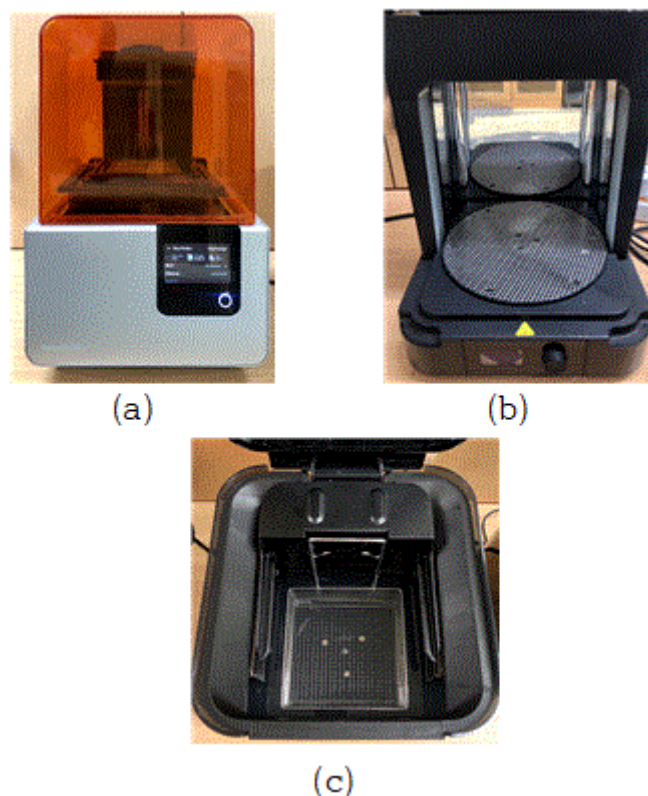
(s) 3D Printer(L.Corporation, Form2, SLA) (b) Curing machine (c) Washing machine
